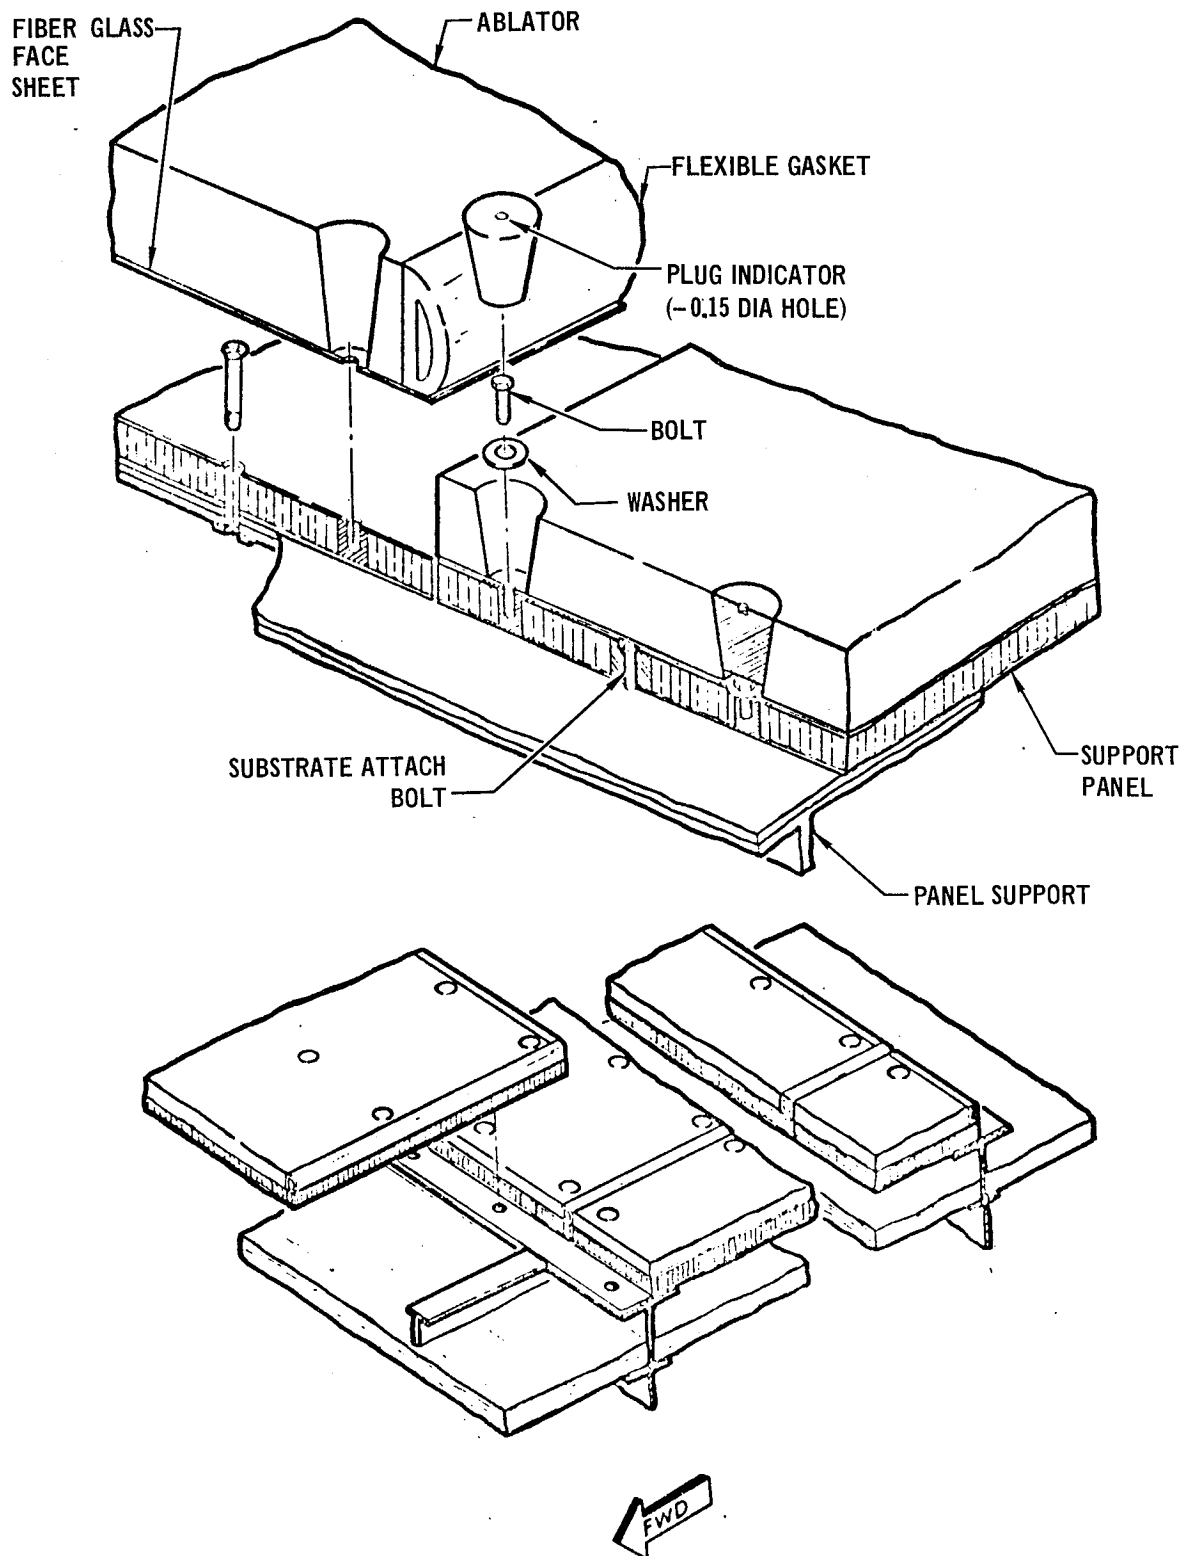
MULTIPLE MECHANICAL FASTENER ATTACH CONCEPT
